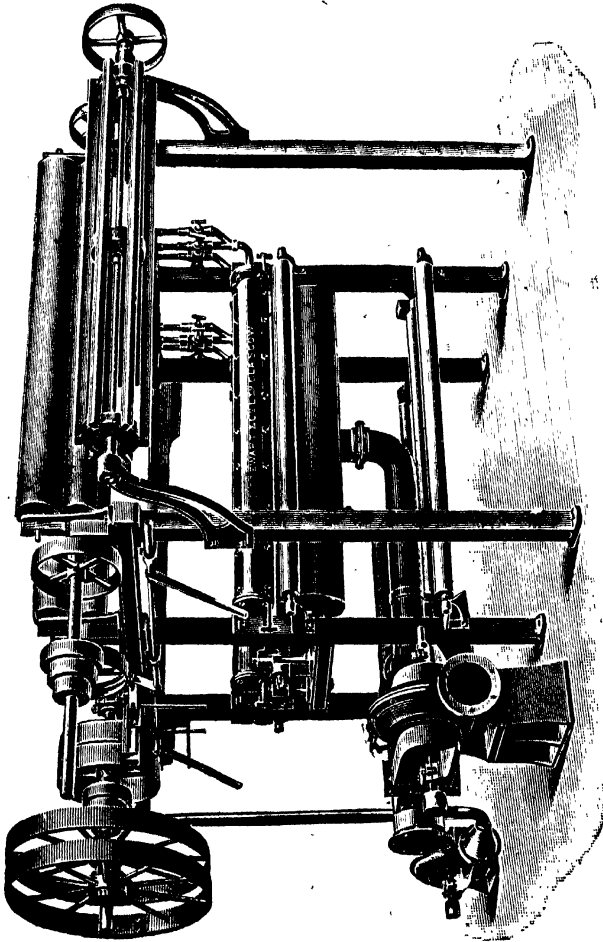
Horizontal gas singeing machine (Duncan Stewart & Co., Glasgow).
